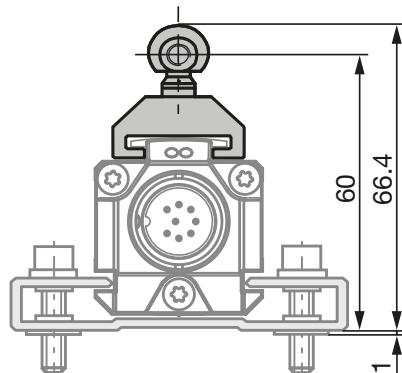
Dimensions and distances with BTL5-F-2814-1S magnet
